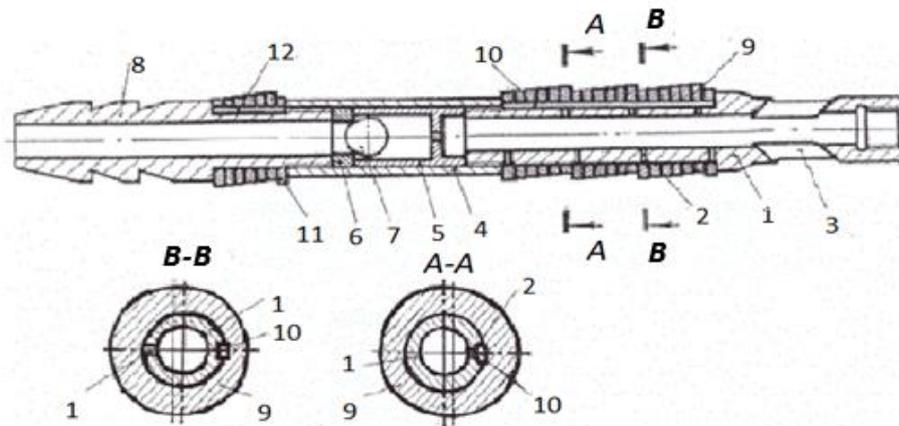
The shortened plunger of the sucker-rod pump in the section: 1 - housing; 2 - radial hole; 3 - hole; 4 - valve box; 5 - cell; 6 - saddle; 7 - ball; 8 - tip; 9 - sealing rings; 10, 12 - keyed connection; 11 - centering rings.
